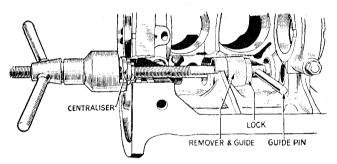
Fitting Intermediate Camshaft Bearing using Churchill Multipurpose Tool No. 32 with Adaptors S.32-1.
